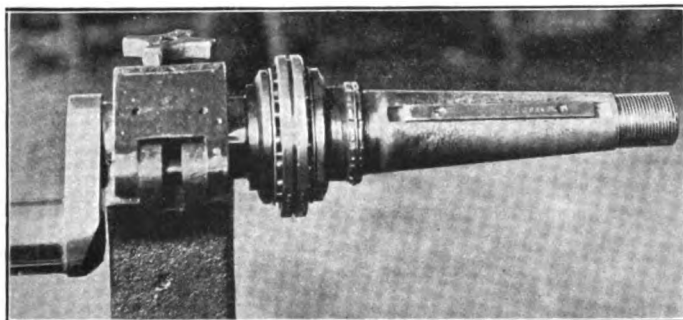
Propeller end camshaft bearing and oil leads, models A, I and E.
